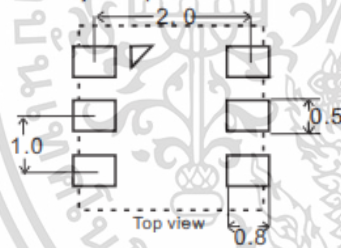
Recommended design size of AHT20 PCB (mm) and the outer part with dotted line is the outer dimension of SMD package.
